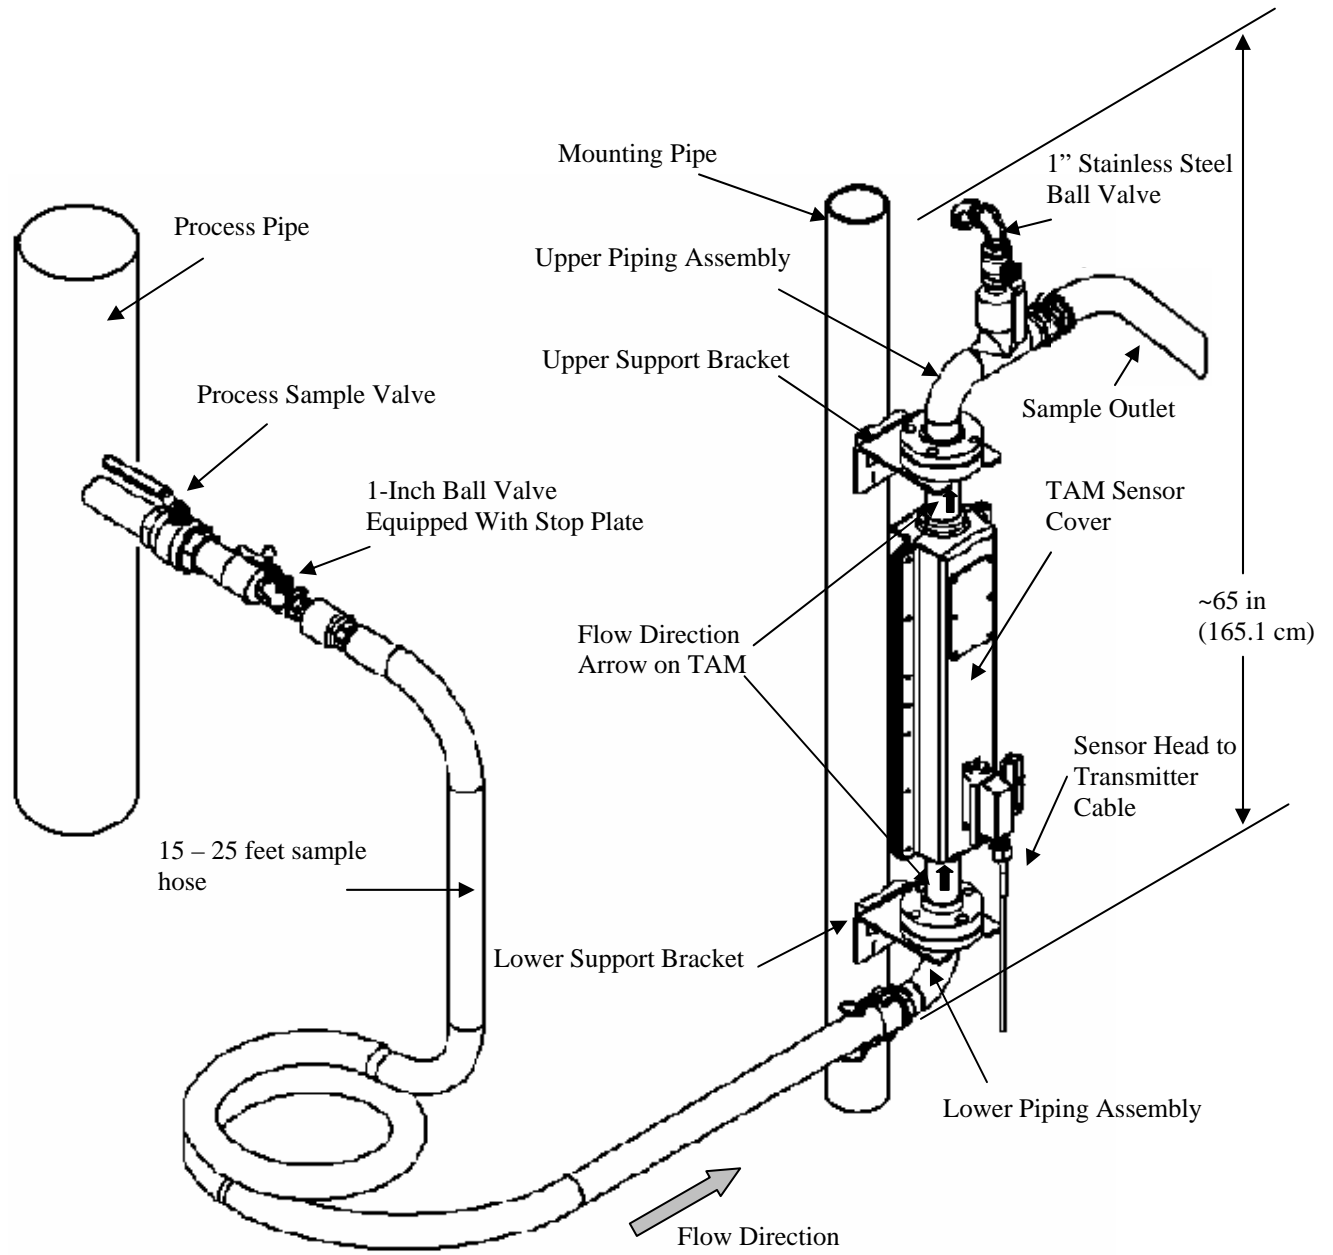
TAM Sensor Head Assembly Installed on Process Pipe
